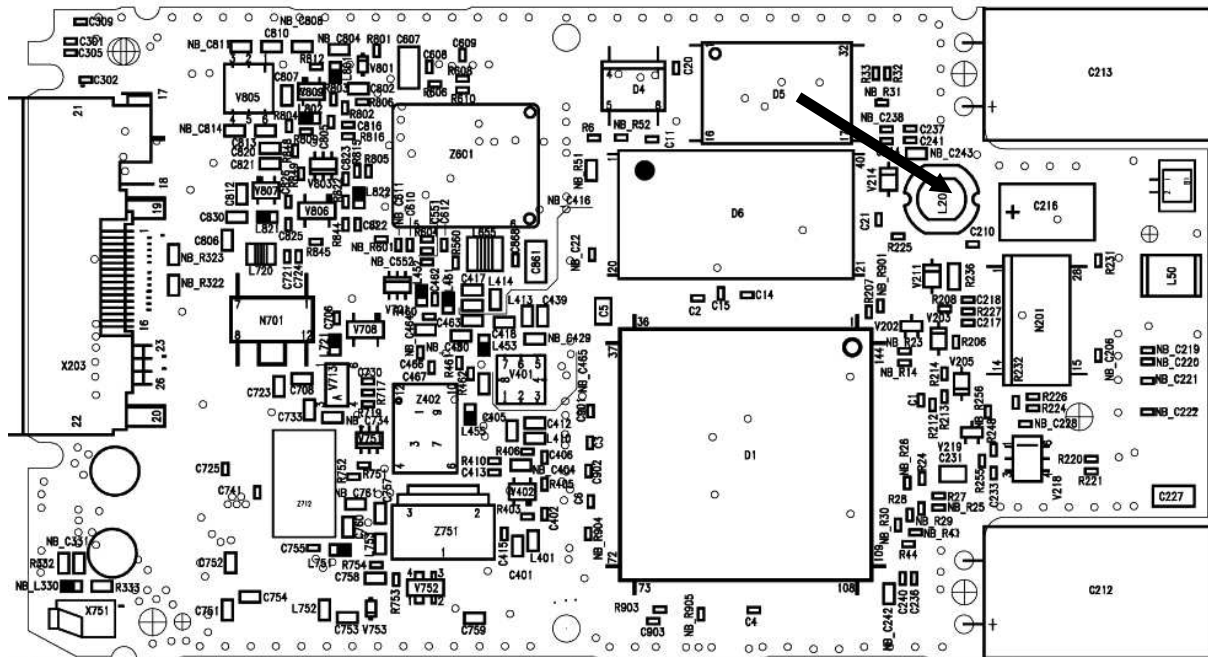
C10 Board 18 $\mu$ H Coil (L201) Side
